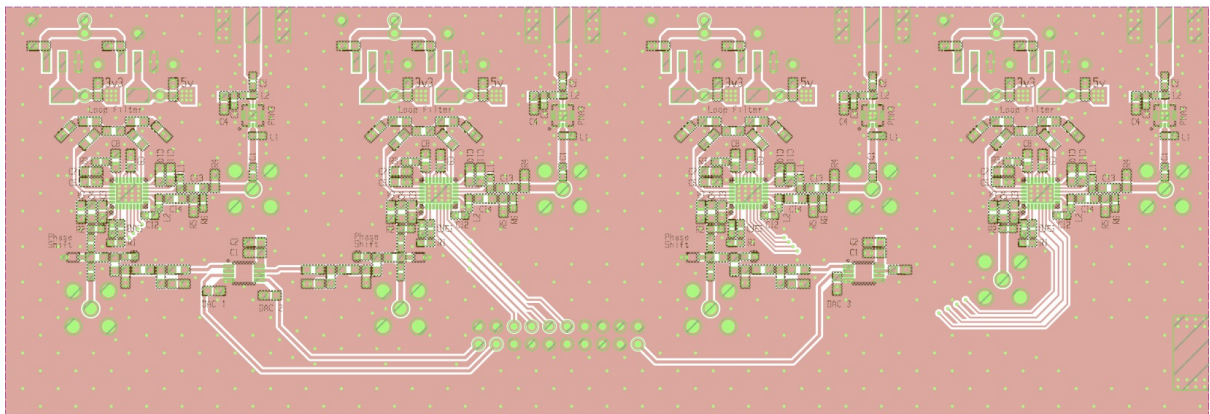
DLL-HPC transmitted signal beamformer top-side PCB layout
